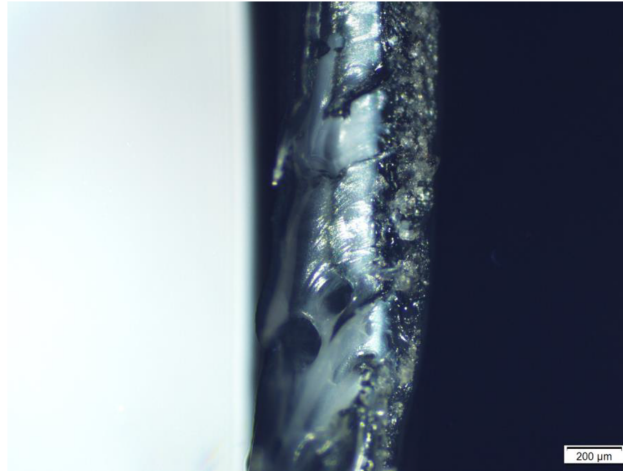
Optical microscope image of tear test fracture surface for LIRF-welded sample (necking and crazing are clearly visible).
